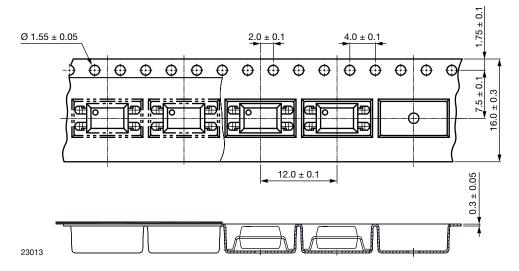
Tape and Reel Packaging (1000 pieces on reel)
